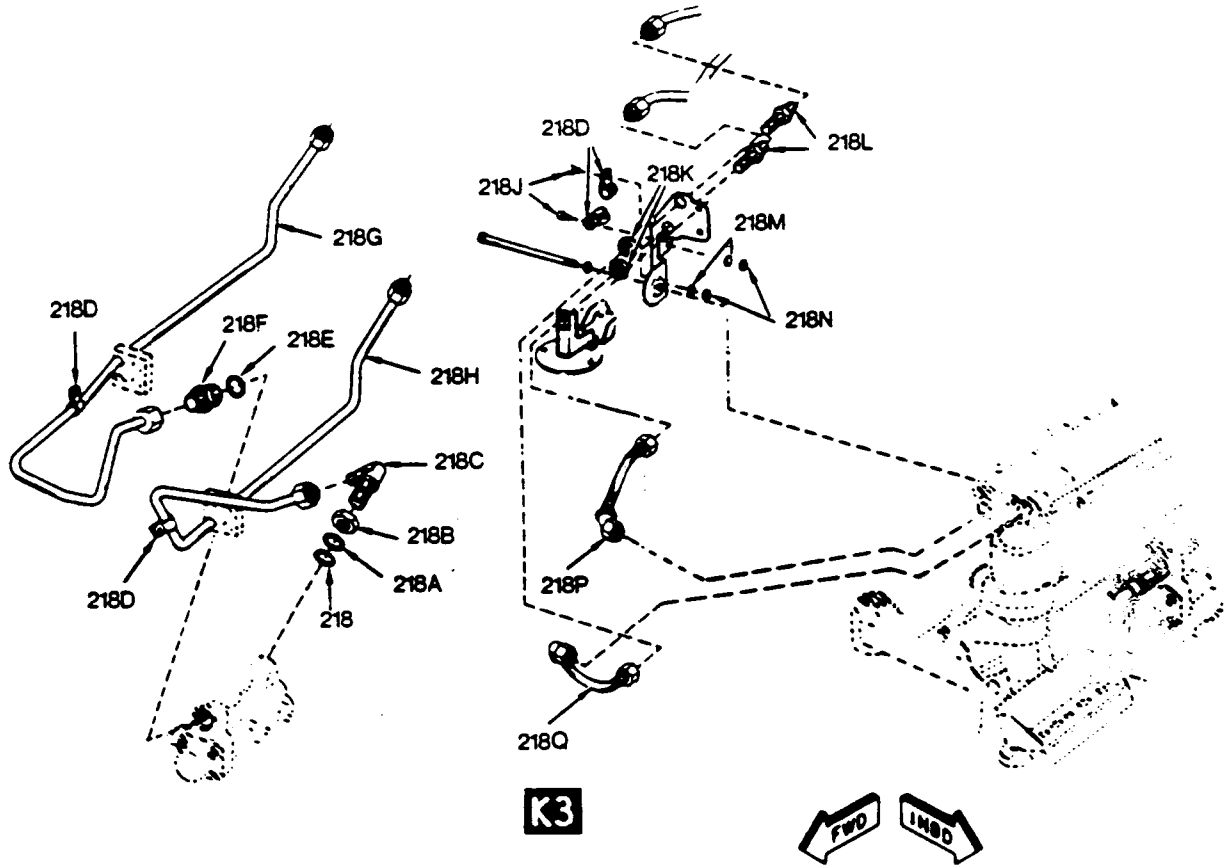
RH Aft Strut Assembly (Sheet 10 of 18)
